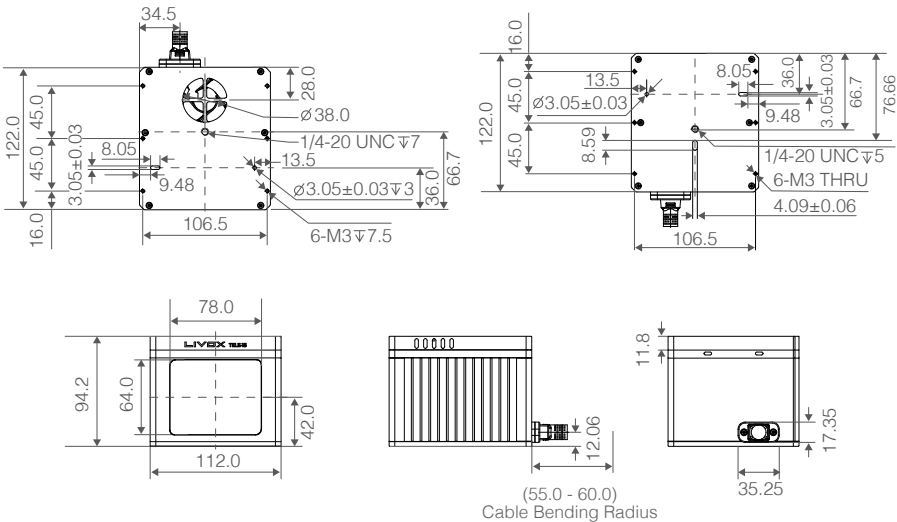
The Tele-15 Dimensions with Self-Dissipation Module (refer to Appendix 1)
